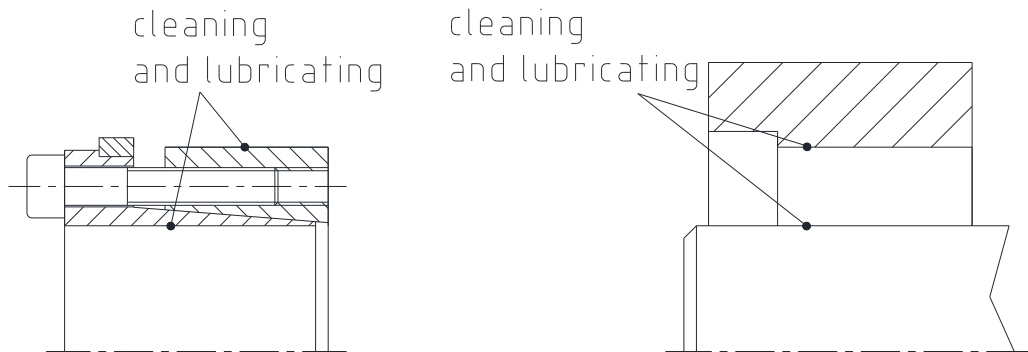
Cleaning and lubricating the contact surfaces (example: CLAMPEX® KTR 201)
